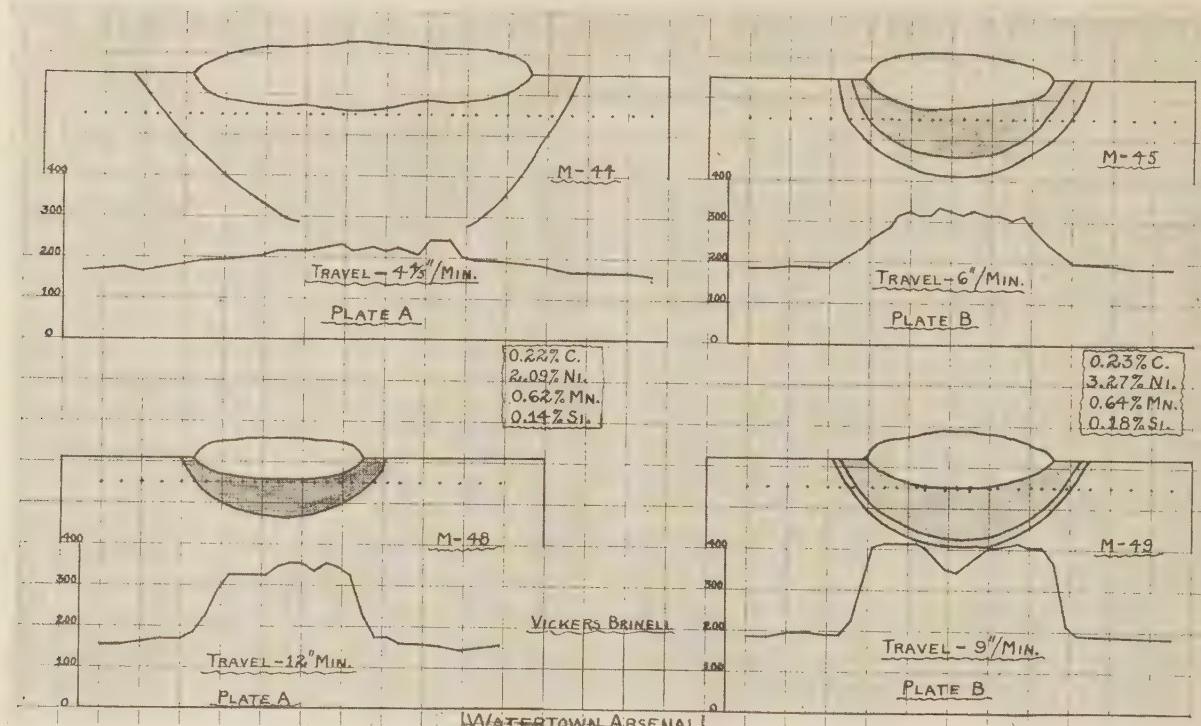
EFFECT OF WELDING HEAT ON 1/2-IN. NI STEEL PLATE
